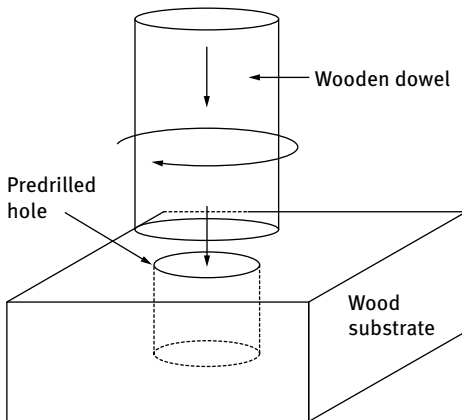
Schematic example of frictional movement used in high-speed rotational dowel welding.
